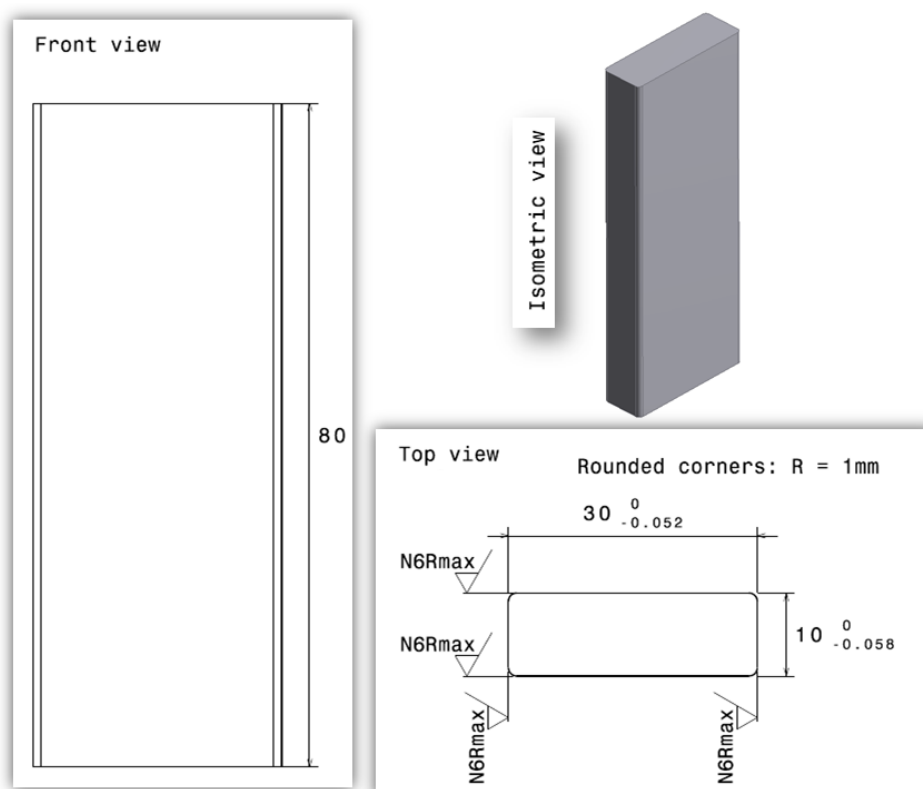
Tungsten brick dimensions and tolerances.
